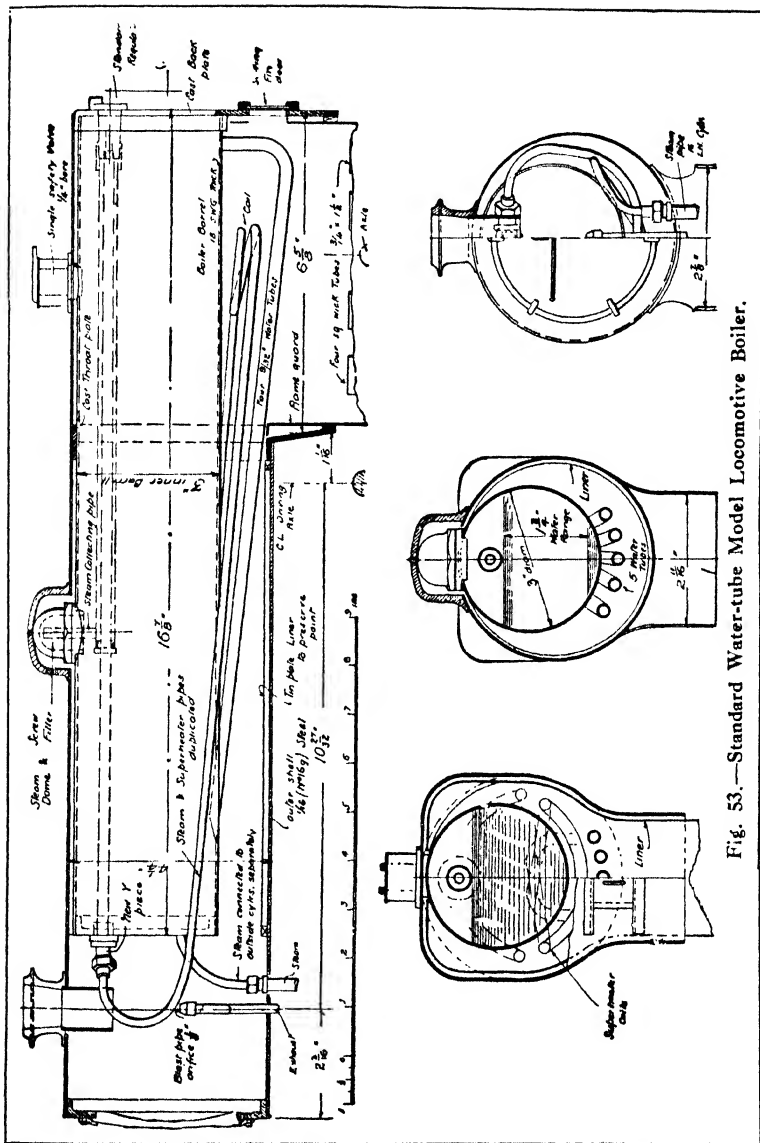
Standard Water-tube Model Locomotive Boiler.
